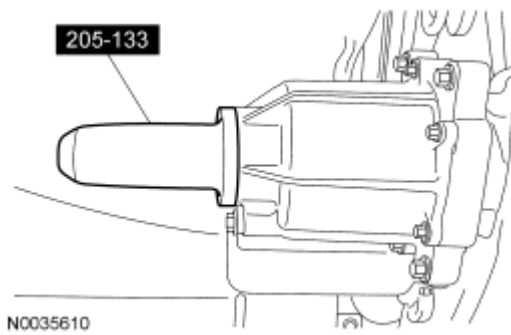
Installing Drive Pinion Seal Using Special Tool (205-133)
